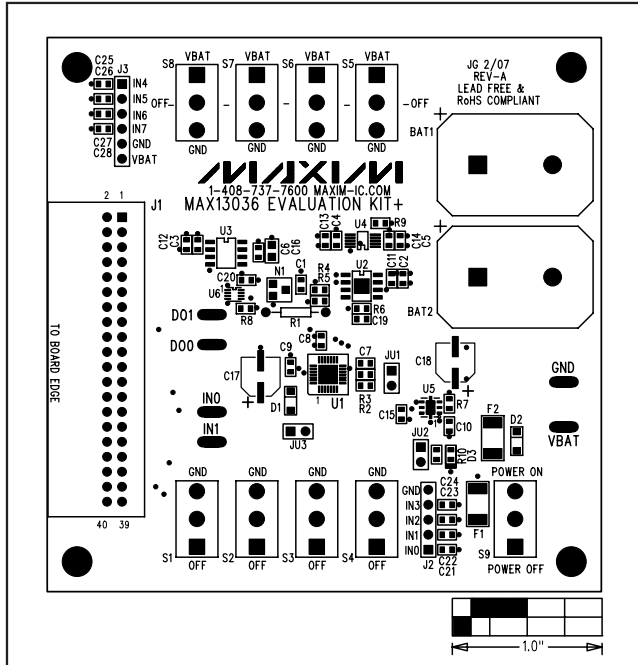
MAX13036 EV Kit Component Placement Guide—Component Side
